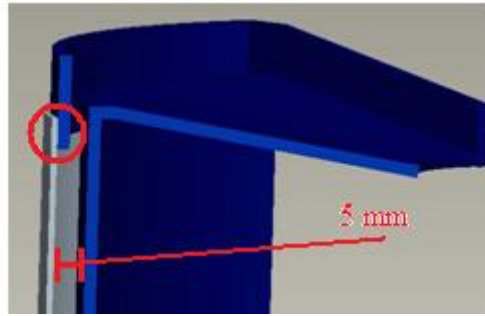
Model highlighting the positioning of the aluminium sheet in the Rig A prototype.
